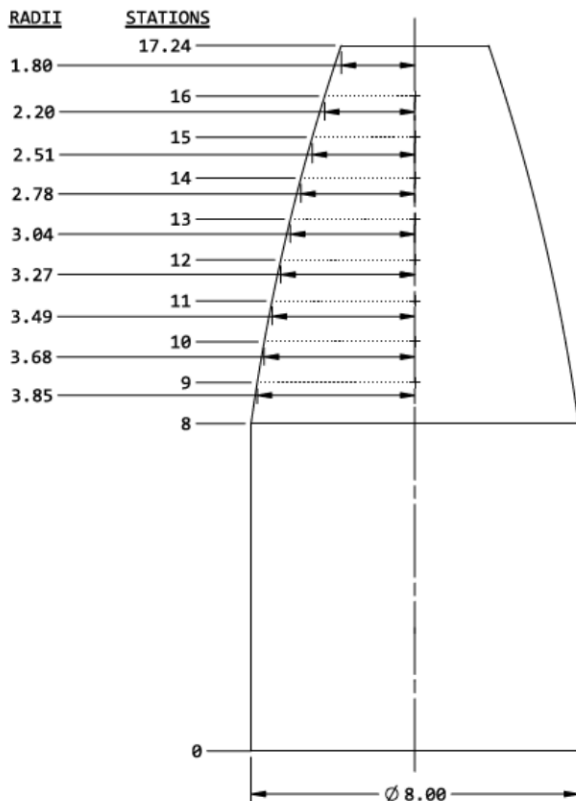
Dimensions of the 17 [m] Starship payload bay. The payload bay length can be extended to 22 [m]. The dimensions are provided in meters. ¹
